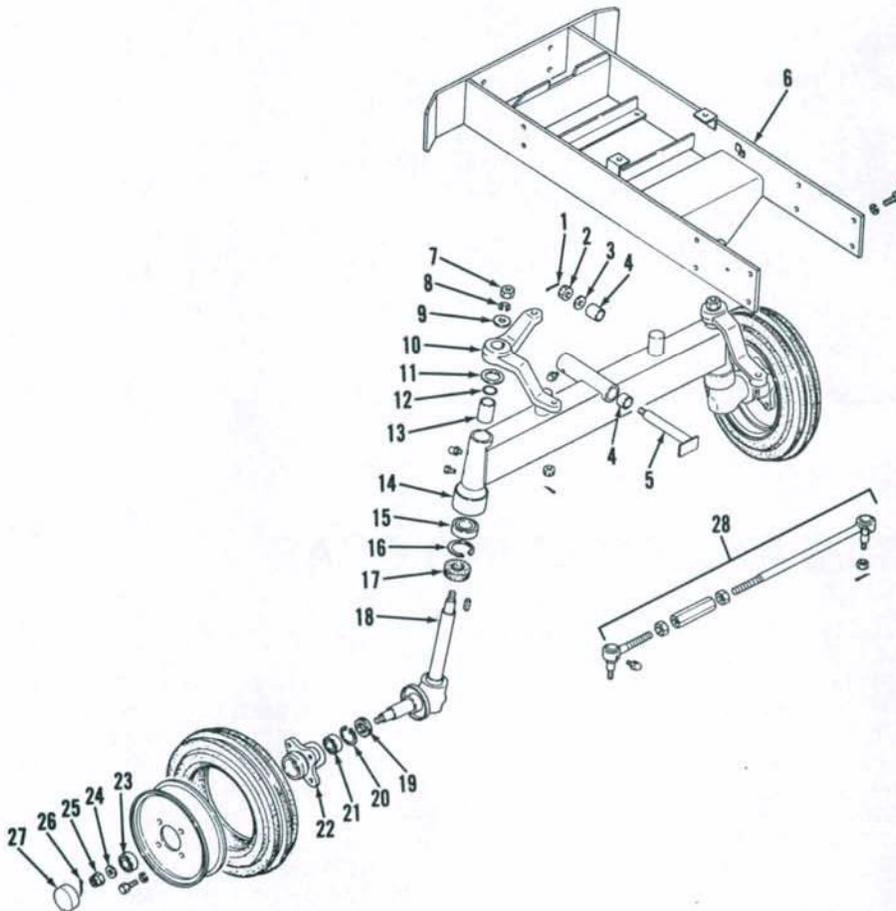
Exploded view of non-adjustable front axle used on YM155 models. Axle used on YM135 is similar.
